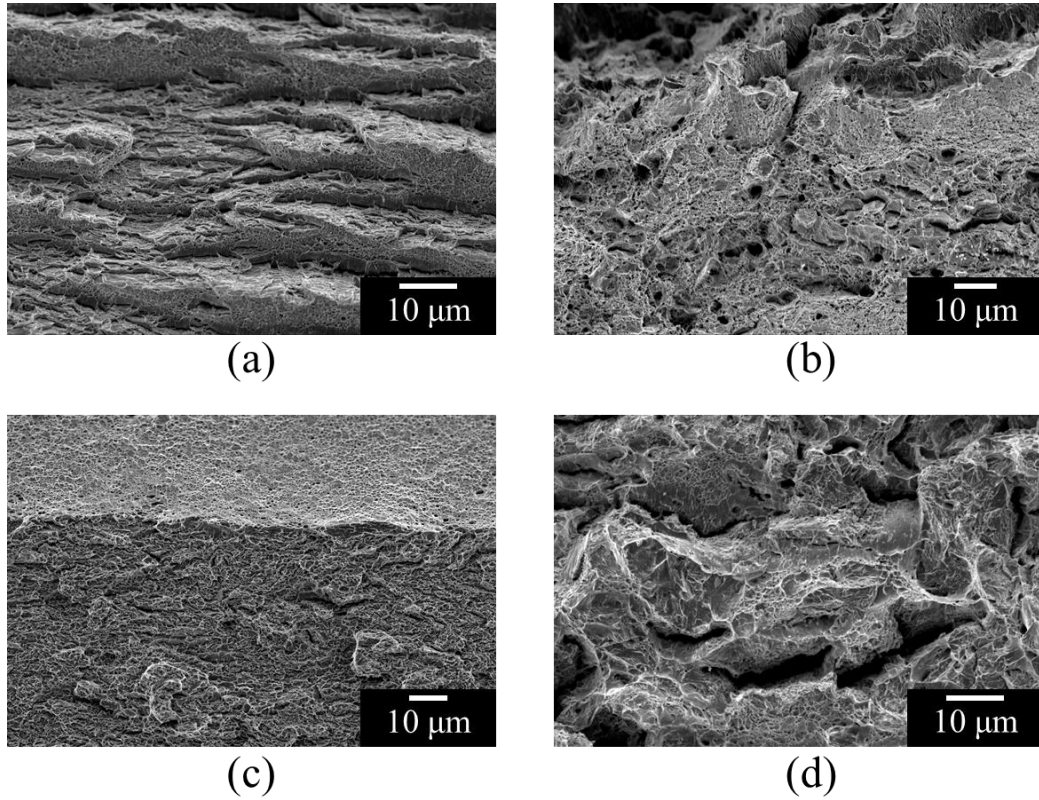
Fracture surfaces (high magnification) of (a) TM-690-120; (b) M-670-60; (c) TM-730-240 and (d) M-710-60.
